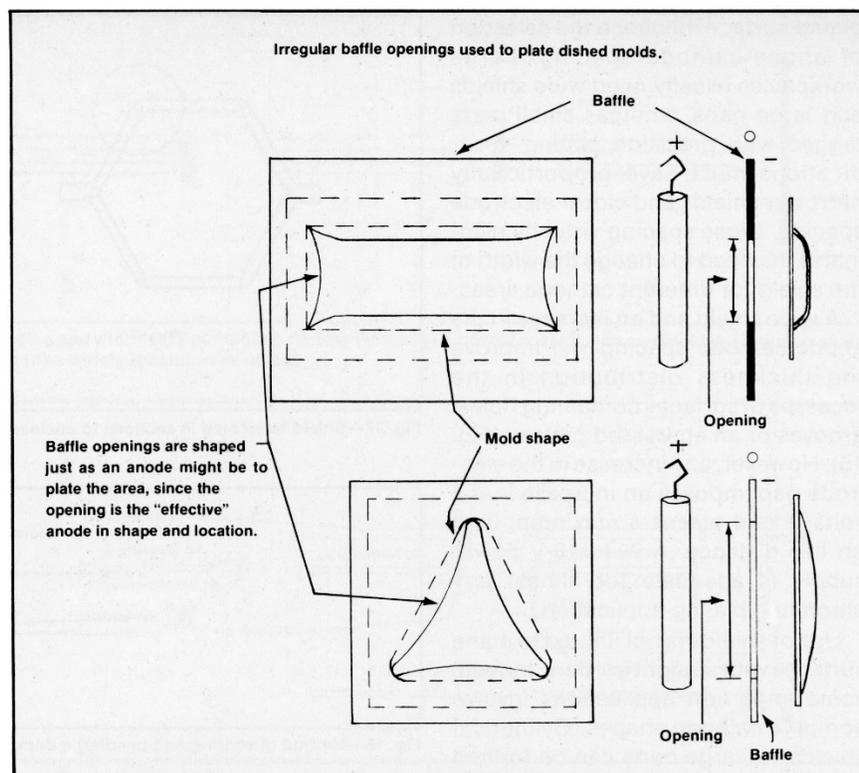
Baffle with openings designed to plate a shallow dish in a mold.
